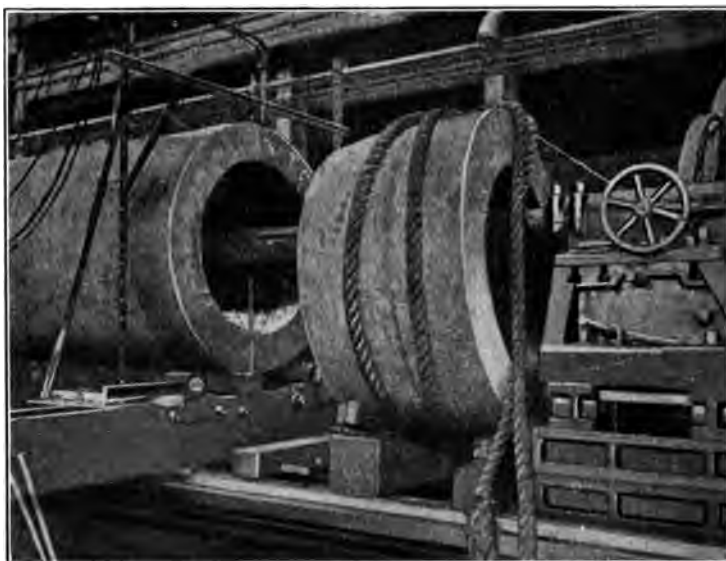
BODY OF STEAM TURBINE ROTOR OF CAST STEEL.
